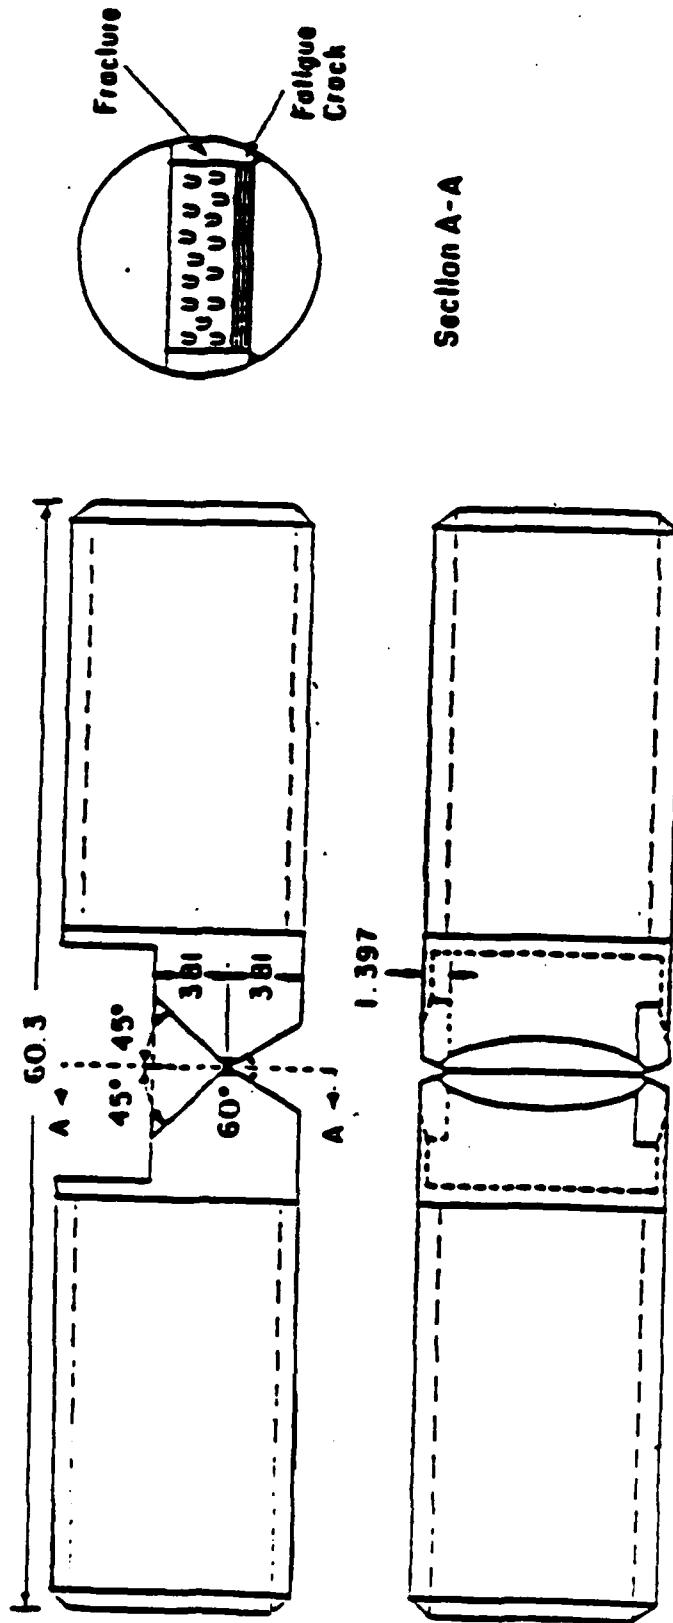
Second machining (after fatigue precracking) for the symmetric specimens; a is the fatigue precrack
